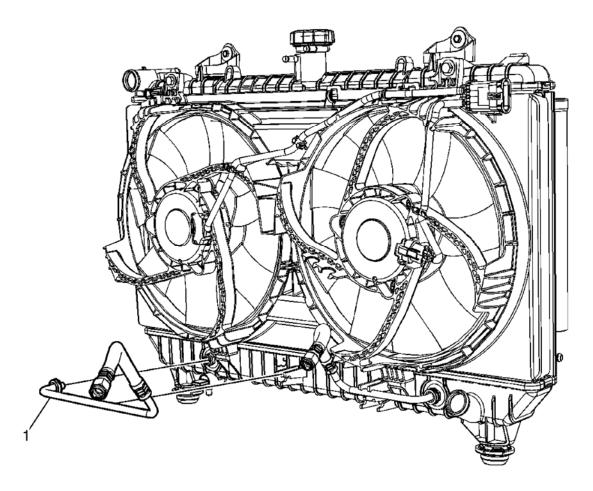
Transmission Fluid Cooler Inlet Pipe Courtesy of GENERAL MOTORS CORP.
